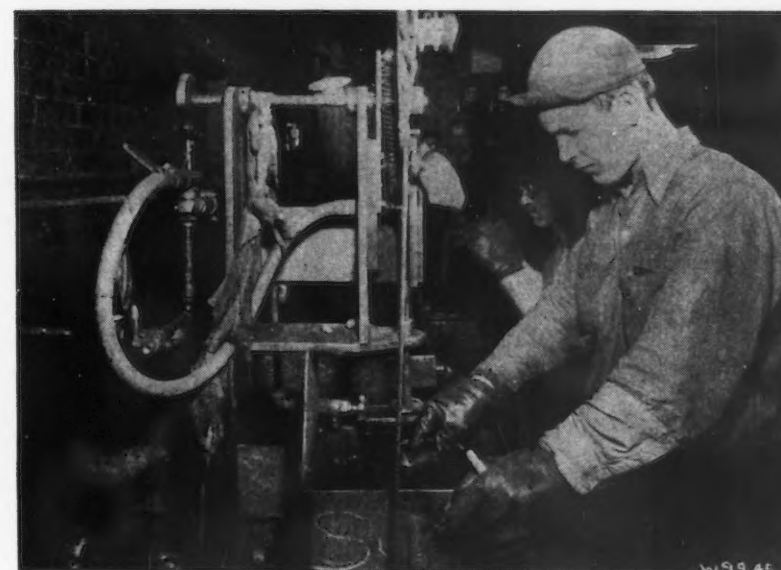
Pressure testing apparatus used to assure air and water tight construction of bombs.
